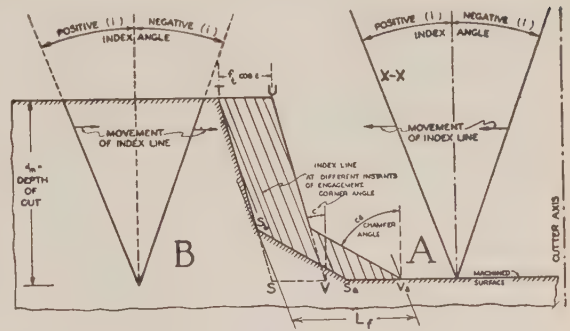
GRAPHICAL METHOD FOR DETERMINING INITIAL CONTACT OF CUTTER AND WORK, AND ALSO THE PROGRESS OF THEIR ENGAGEMENT FOR ANY SHAPE OF THE CUTTING EDGE
